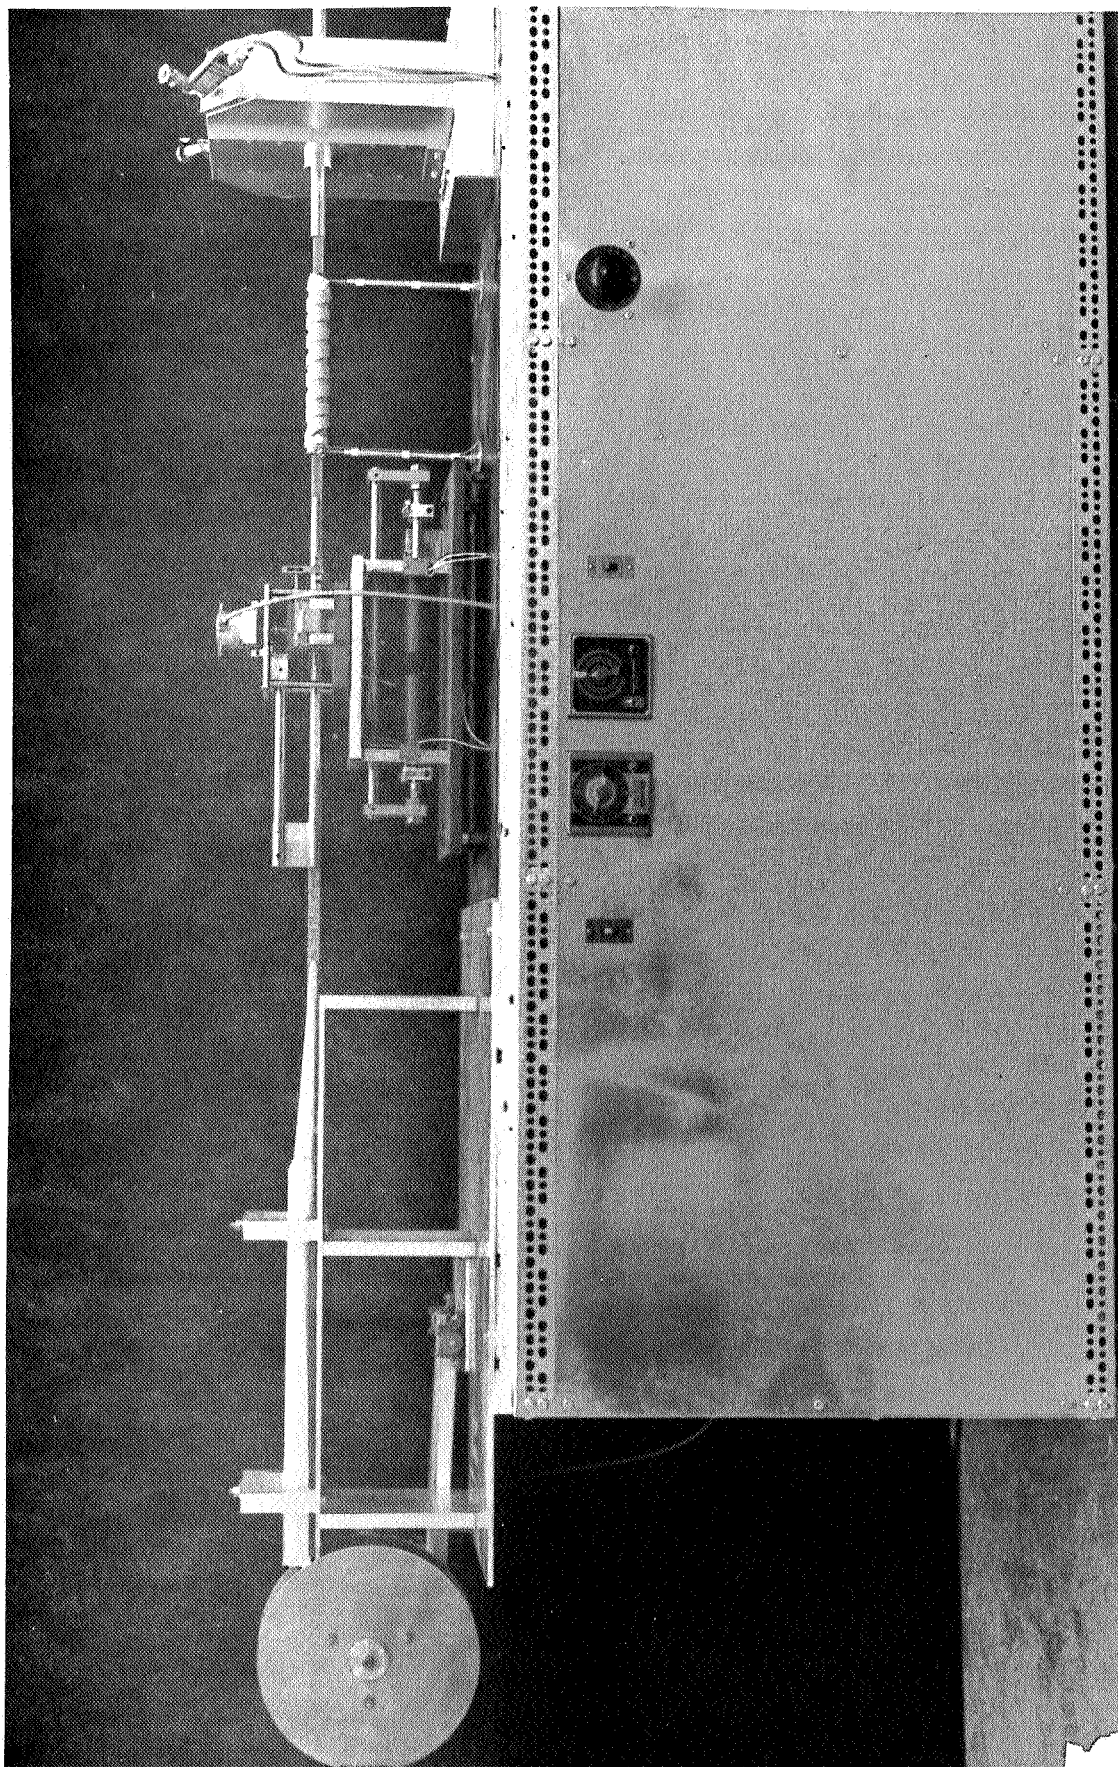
Transport Mechanism, Deforming Mandrel, and Take-Up Reel of Rewind Modification of Tube Forming Equipment
